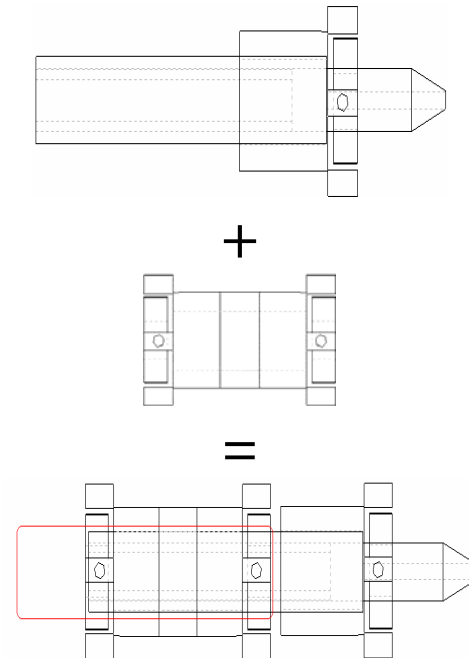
STEP 11—Wellbore Nozzle/Tube Adapter and Tube Assembly
